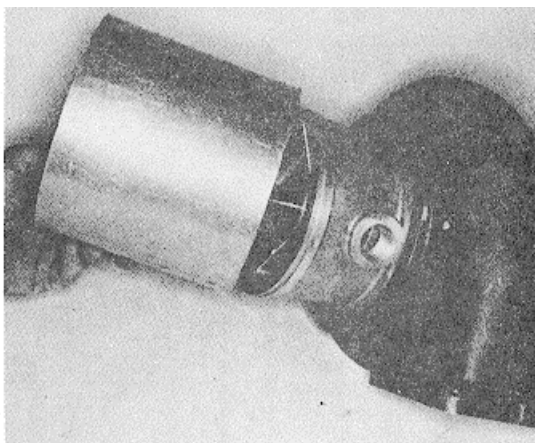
, T-518. positioning St-881 bearing support over bearing housing and against turbine casing
